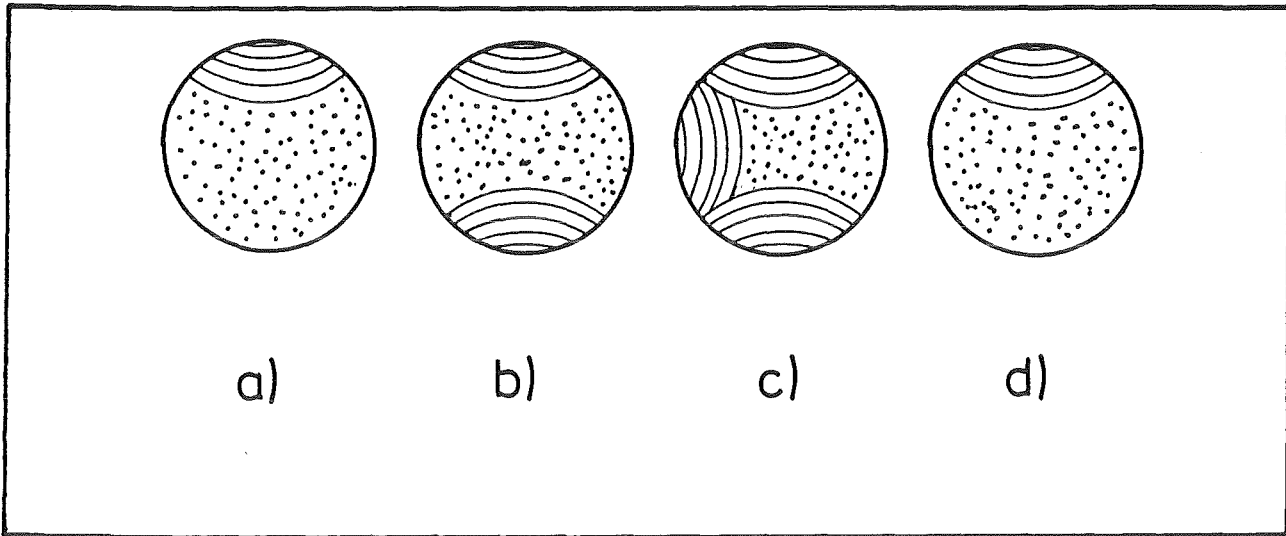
Appearances of fatigue fracture surfaces for different loadings.
